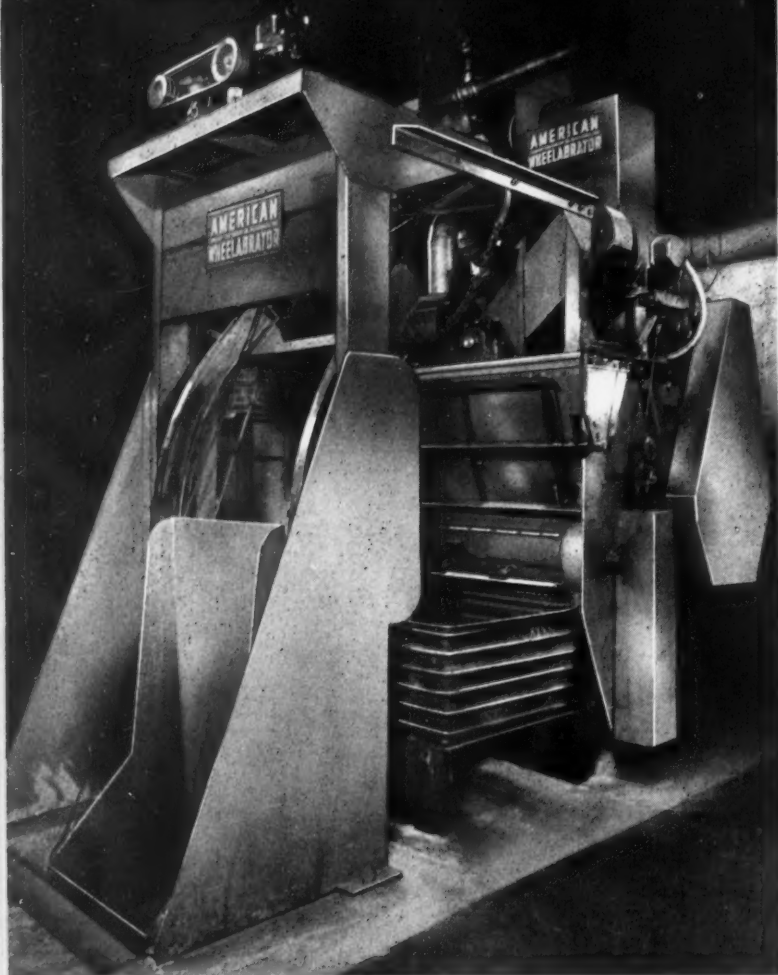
Forgings are Tumbled in This Machine, and are also Cleaned by Sand, which is Whirled against Them by a Rapidly Rotating Wheel. Four Tumbling Machines were Replaced by This One Machine
